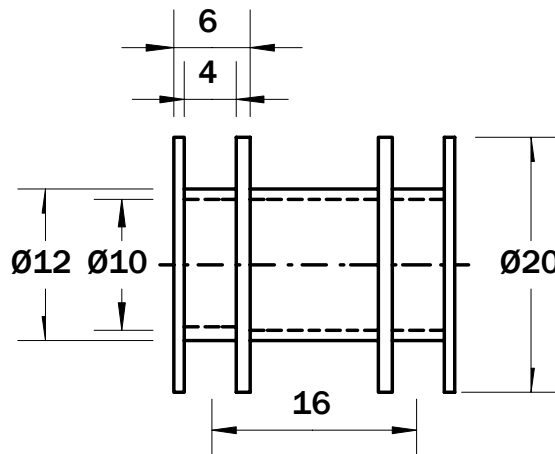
Dimensions of coil former for an ideal Maxwell pair, all dimensions are in millimetres
